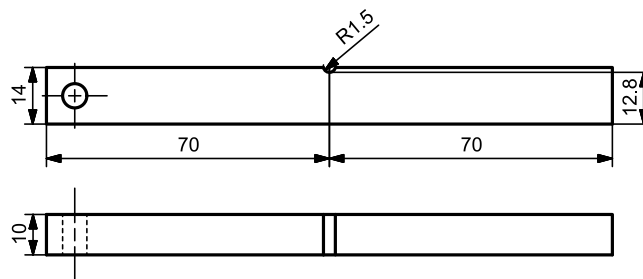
As-machined specimen geometry for TP2. All dimensions are given in millimeters.
